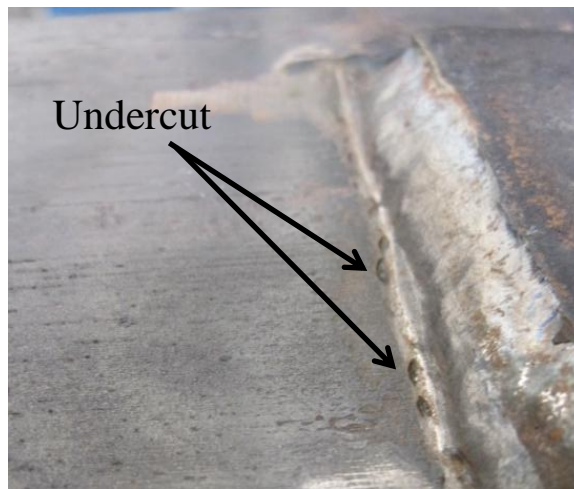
Undercut at Toe of Fillet Weld Connection (Example)
